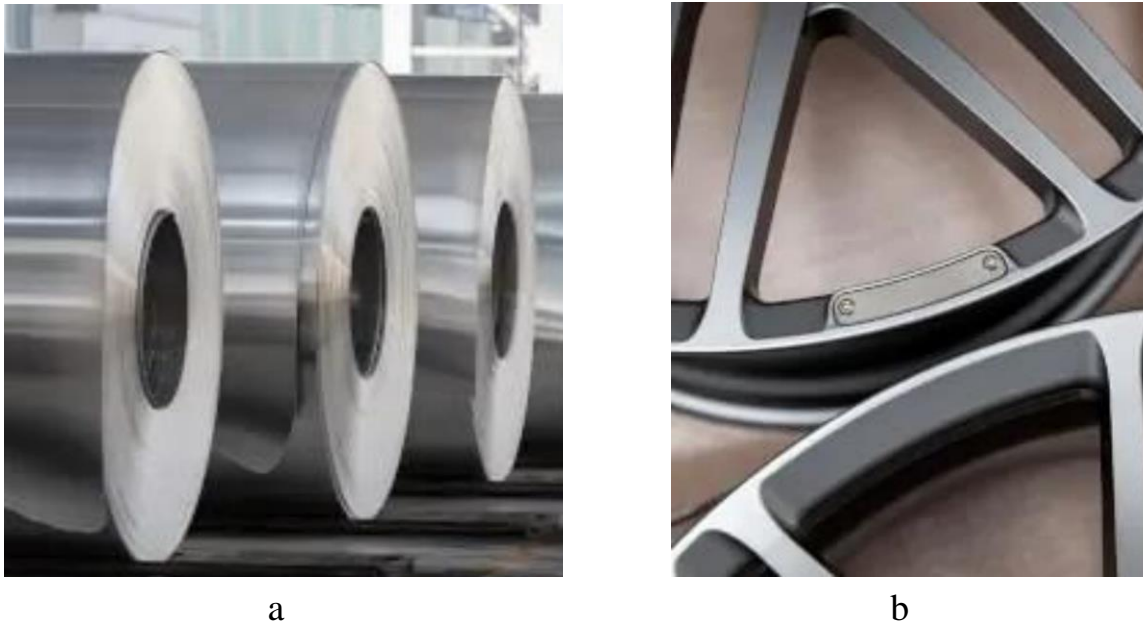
Rolls of aluminum sheet (a) and forged aluminum wheels (b).
